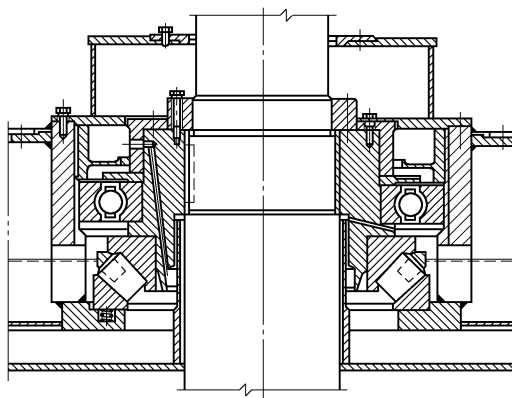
23 Shaft end tapered shape sleeve transporting oil
